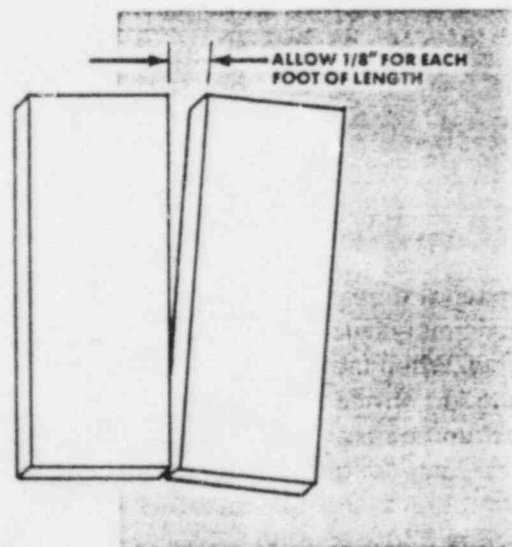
Provide a space between the edges to be welded.
